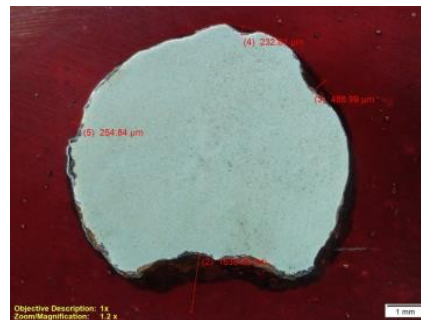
Macro Photo of Corroded Spring A Etching in Cross Section Location 3
